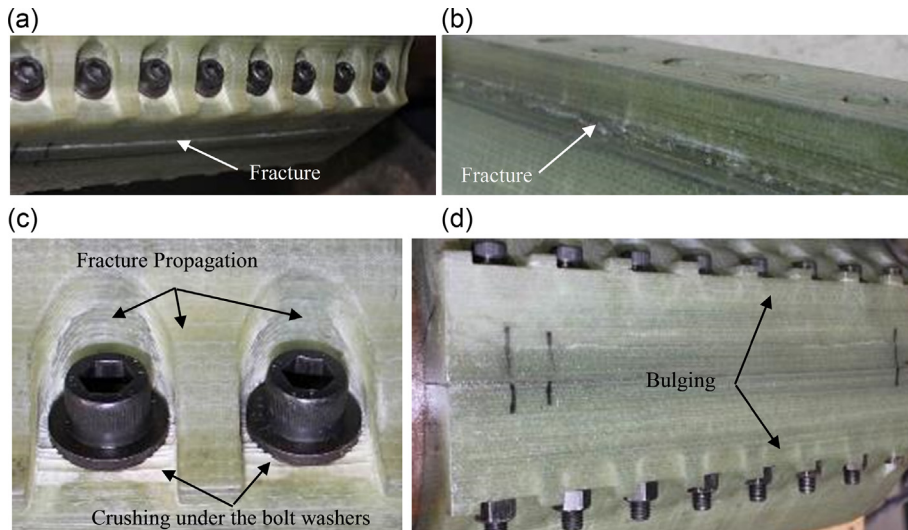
Failure modes for clamp with a harder seal: (a) shear fracture in flange from outside; (b) shear fracture in flange from inside; (c) fracture propagation and crushing around bolt rebates; (d) bulging in flanges.
